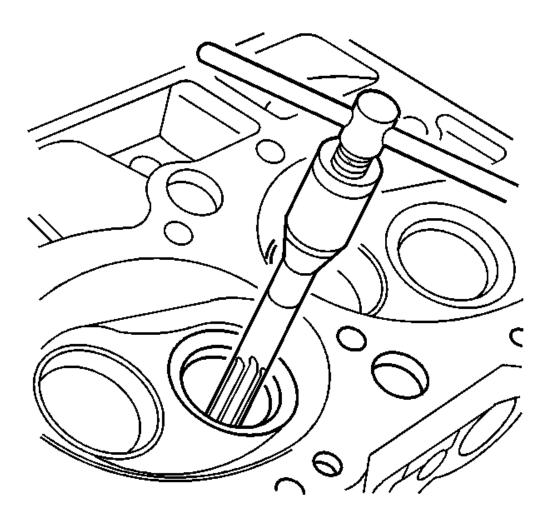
Reaming Valve Guide Courtesy of GENERAL MOTORS CORP.
